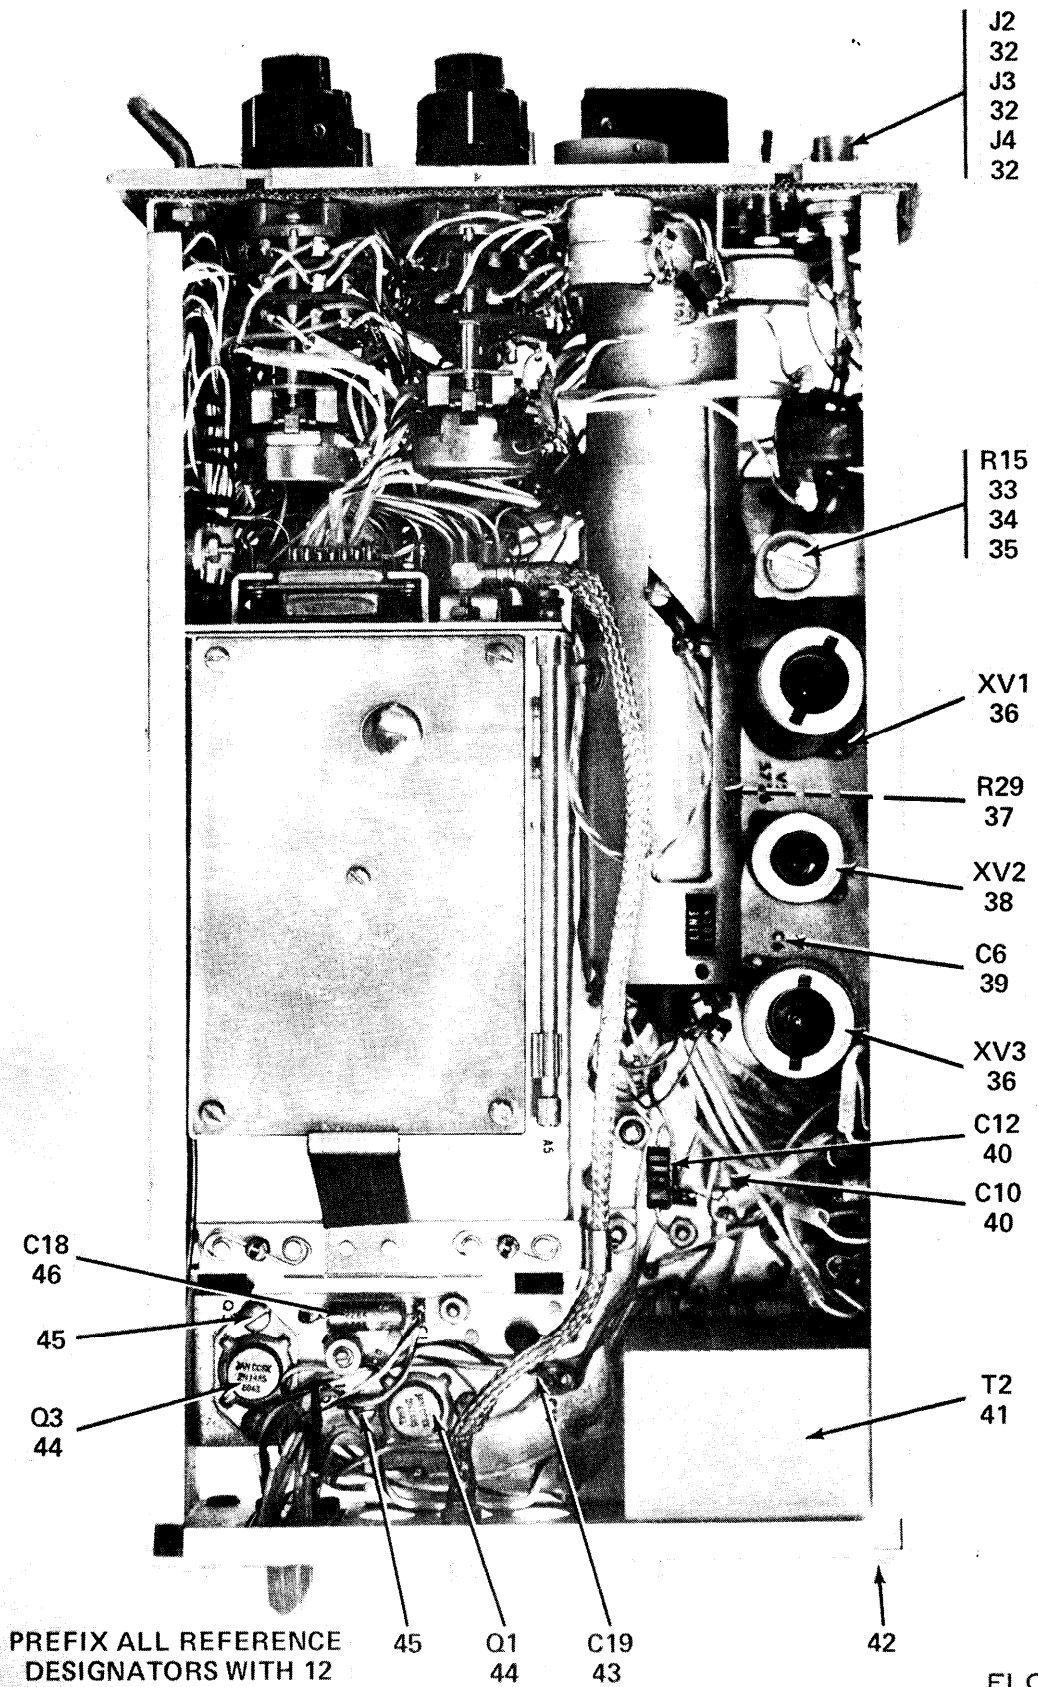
③ Chassis and main harness assembly (sheet 3 of 4).
